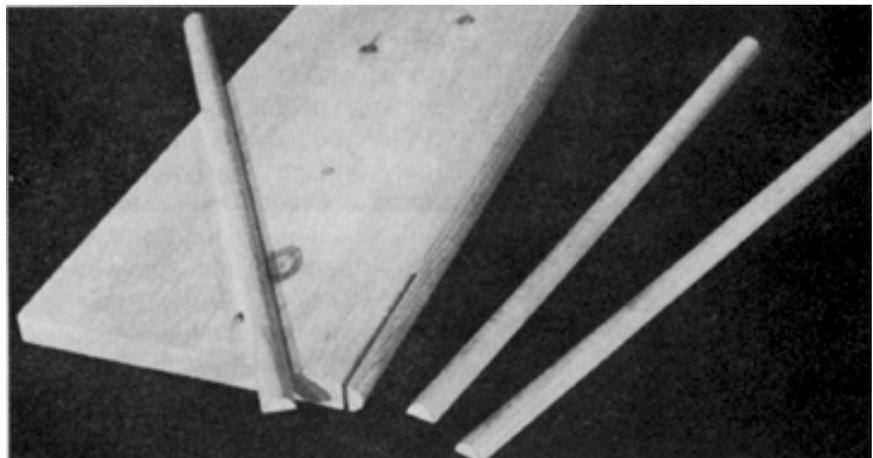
When the edge of the workpiece is sawed off, you have perfect half-round moldings.
